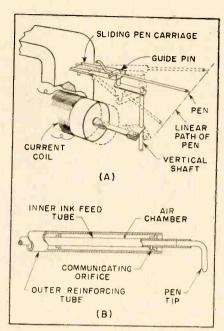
Pictorial view of mechanical linkage (A) and pen construction (B). Drive coil moves in and out horizontally like loudspeaker voice coil, to move pen through linkage
